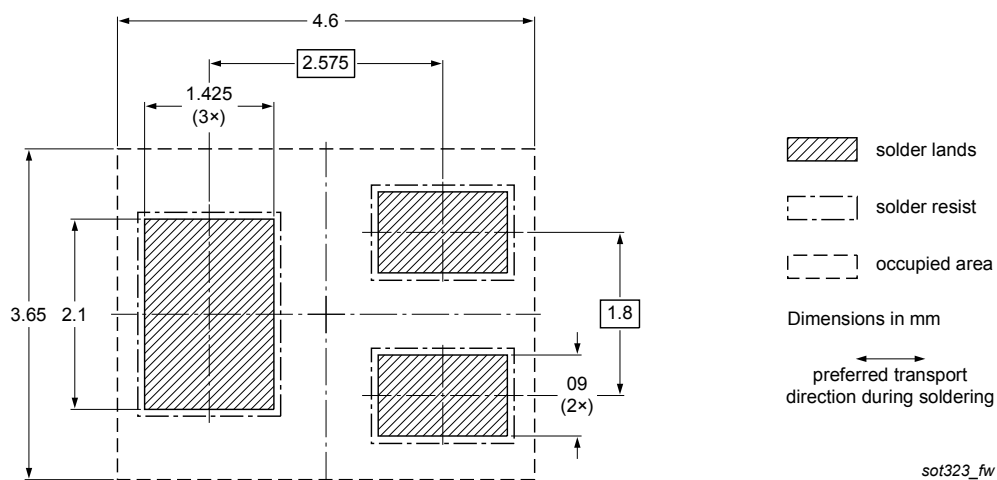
Wave soldering footprint for SC-70 (SOT323)
